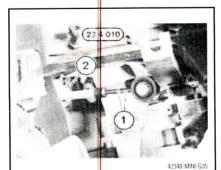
Disconnect the gearshift cables from the ball joints—Cooper S Coupe
